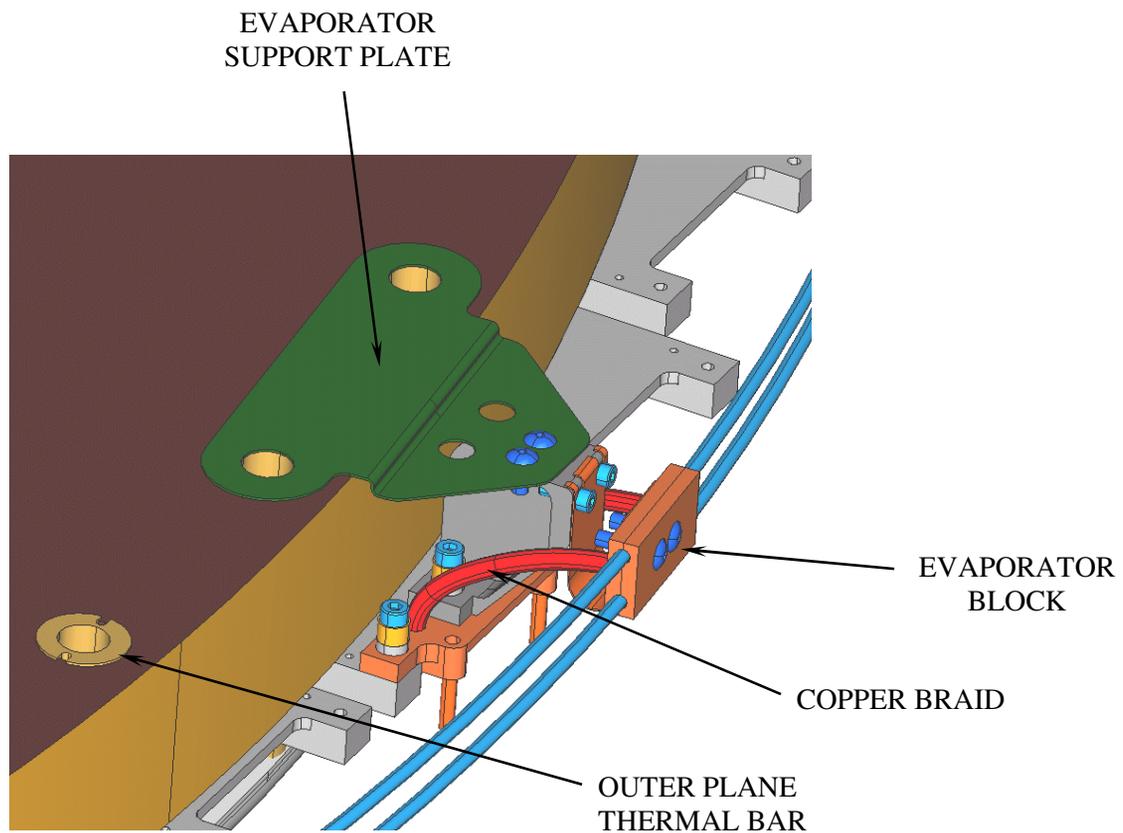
Connection between Outer Plane Thermal Bars and Evaporator
